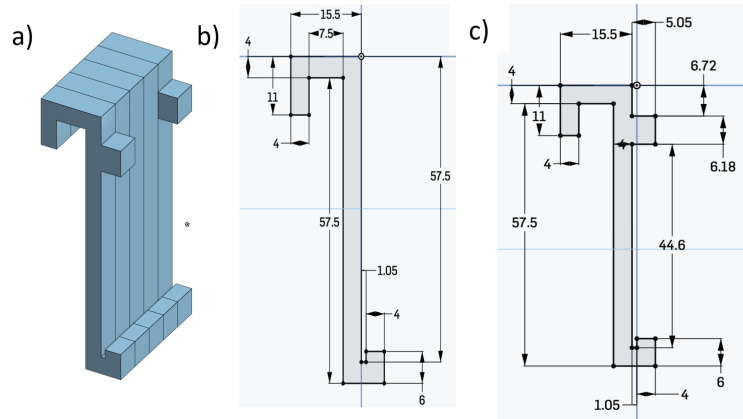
CAD drawings of the water sensor holder composing five individual strips. a) Isometric view, b) sketch of inner strips, and c) sketch of outer strips are shown with dimensions in millimeter.
